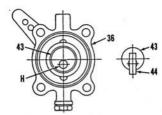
When installing shifter assembly be sure hole (H) in shifter shaft (43) is below shaft centerline before inserting shifter (44).
